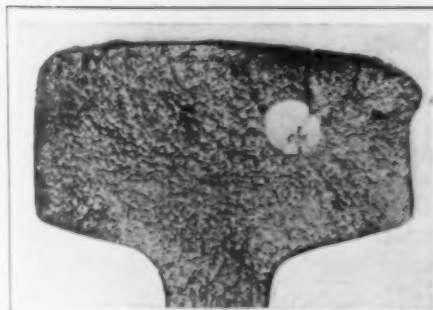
Bessemer Steel Rail Showing Embryo Internal Transverse Fissure
